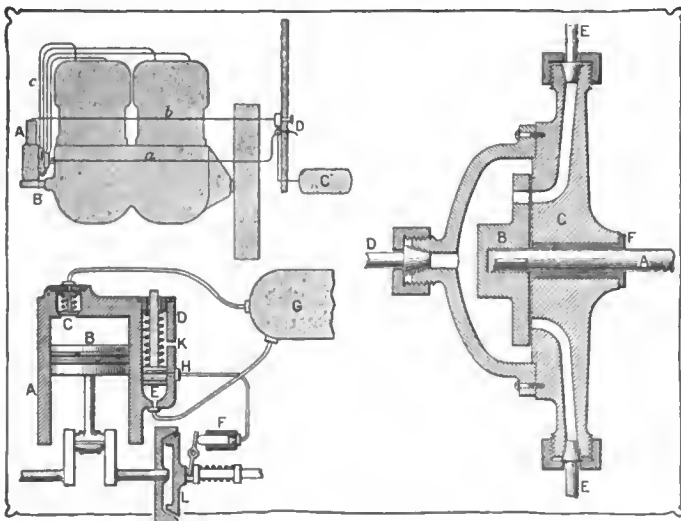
, 2 and 3—Mechanics of compressed-air motor-starters
